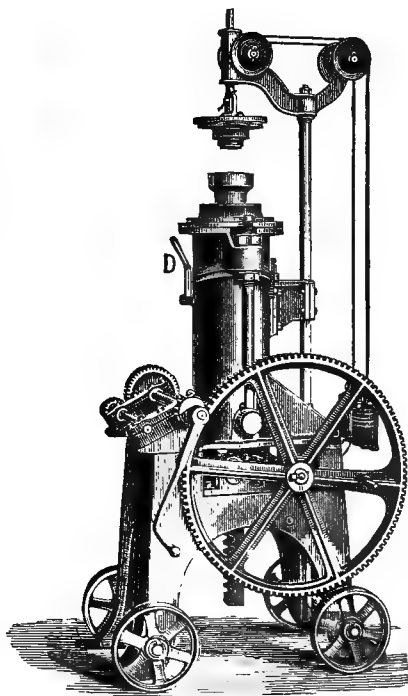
Small drain-pipe machine, by J. Chambrette-Bellon.
